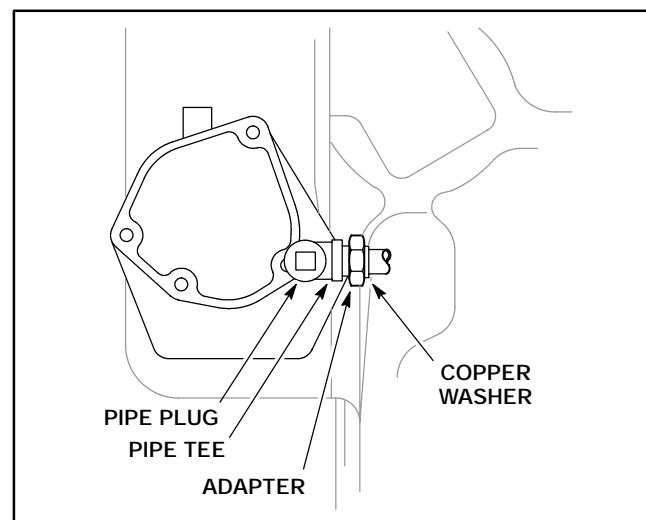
Magneto Drive Oil Supply Adapters
